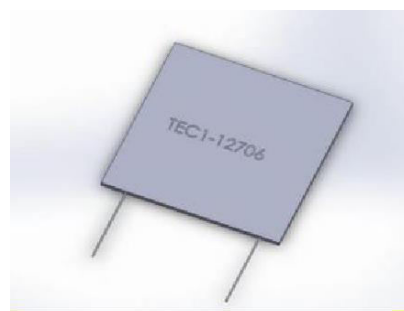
TEG and TEC PLATE Design Dimensions
